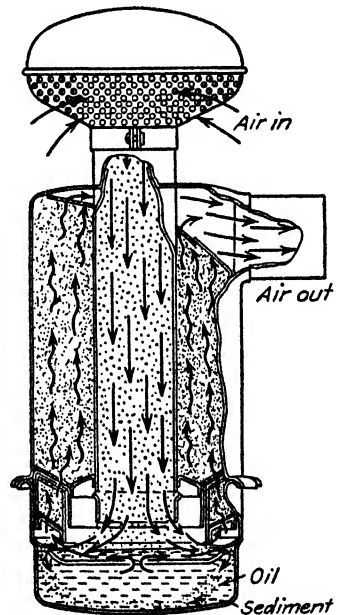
(Right).—OIL-BATH-TYPE AIR CLEANER.
